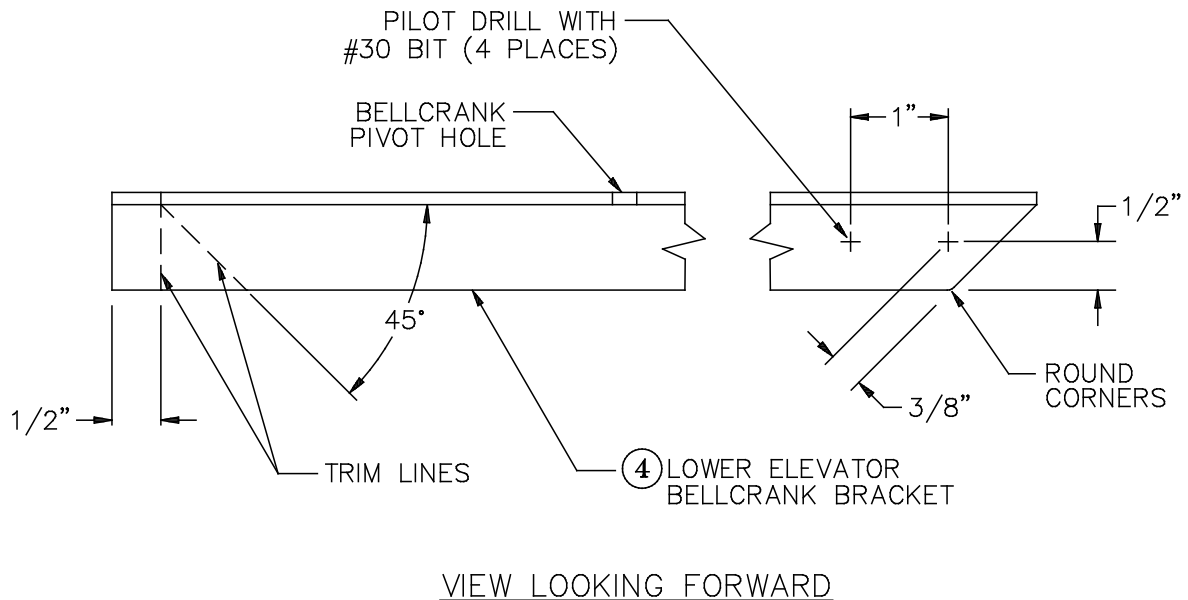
Trimming and Marking Hole Locations on the Lower Elevator Bellcrank Bracket
